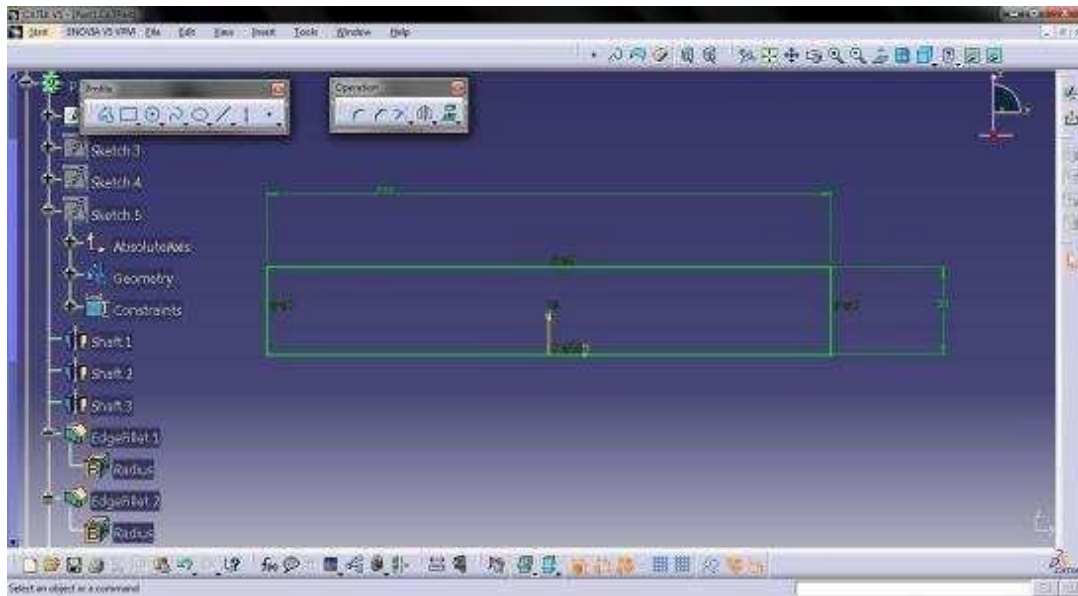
Draw a Rectangle Using Profile Tool Bar
